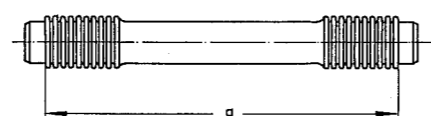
Push rod dimension 'a' should be - 1200 : 180 - 181.5 mm.
